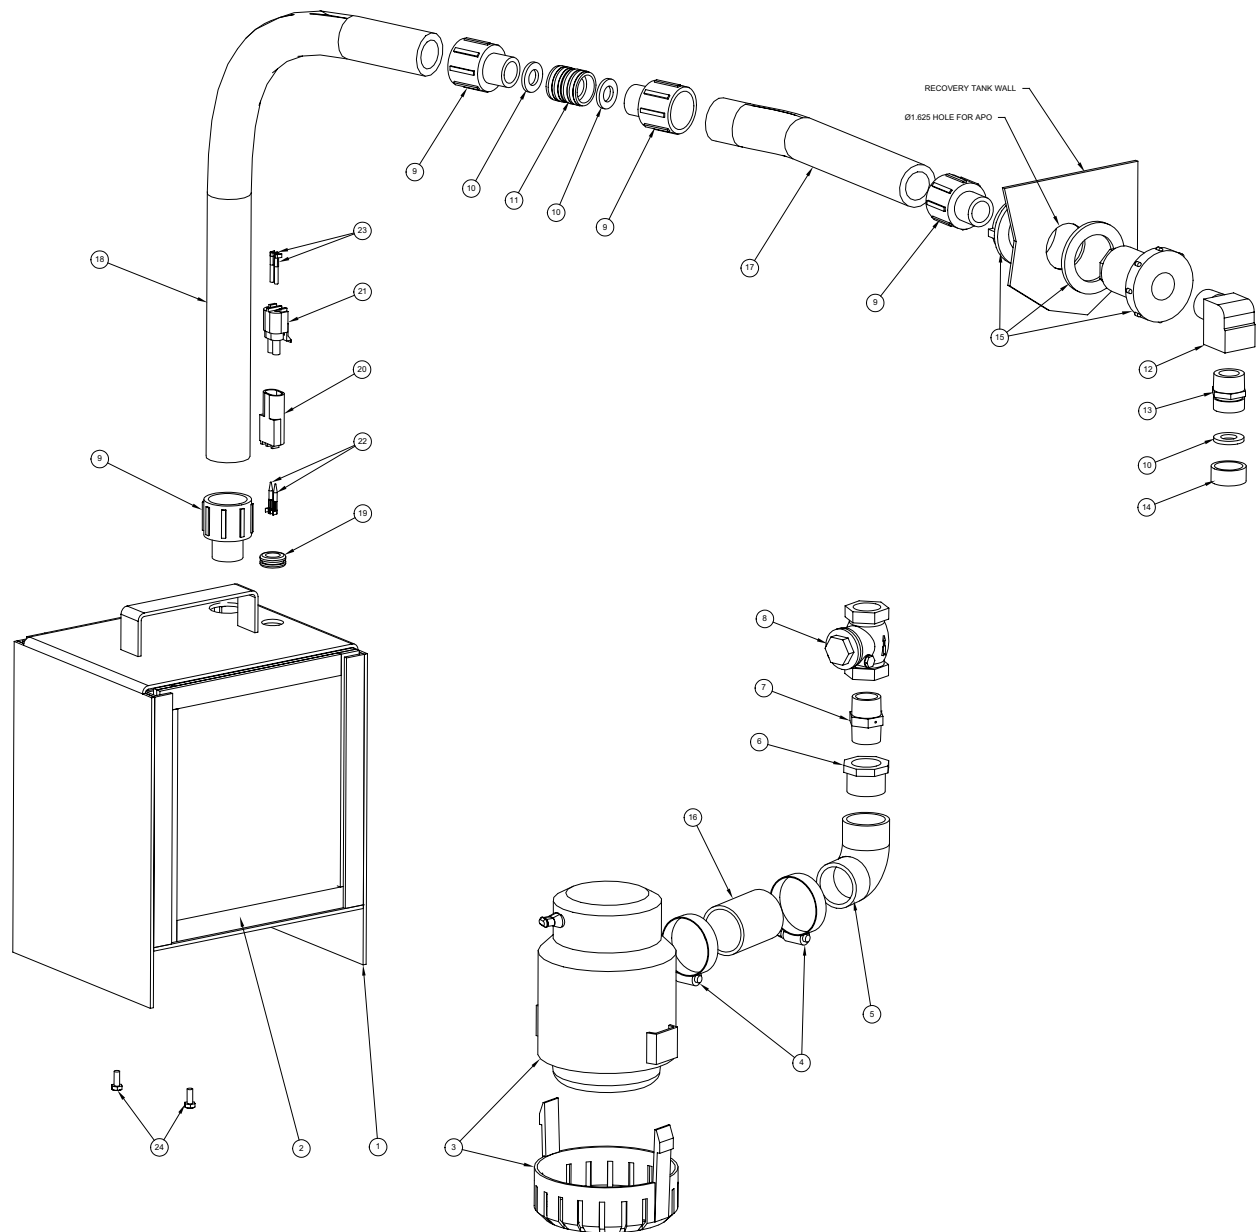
Float Switch - s/s - Recovery Tank Assembly
